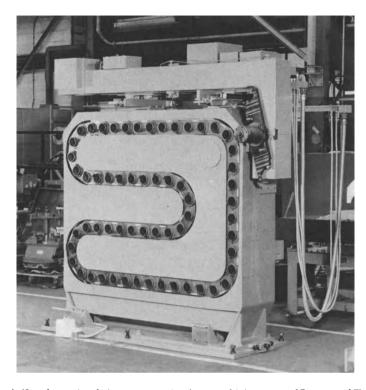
A 60 tool capacity chain-type magazine for a machining centre. [Courtesy of FMT Ltd.]
